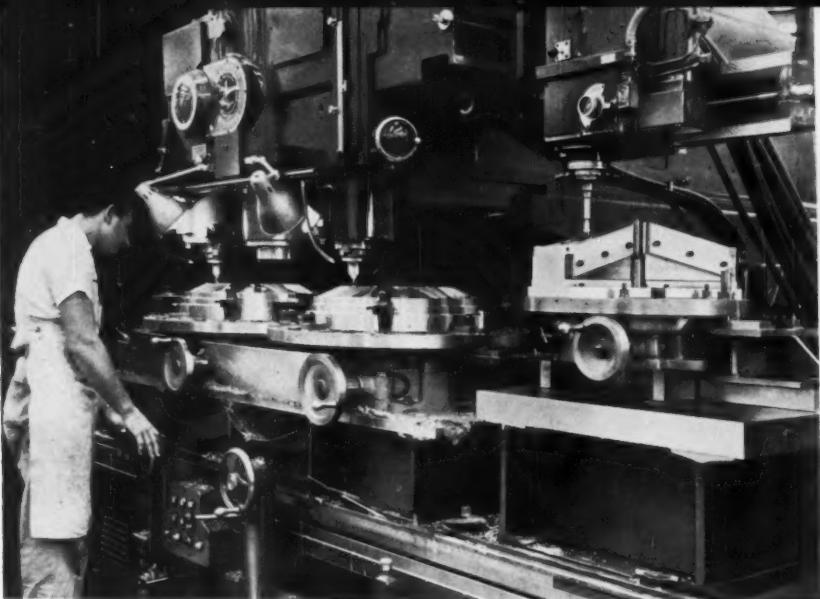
Hydro-Tel milling machine engaged in simultaneously machining twelve propellant cavities on the convex side of two injector plates.
